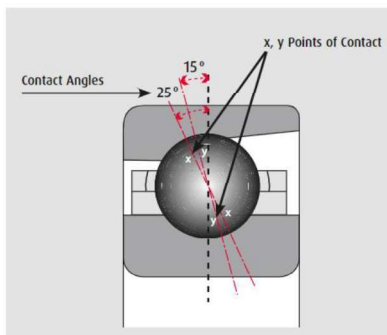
Cross-section of an Angular Contact Ball Bearing and Contact Angle[10]
